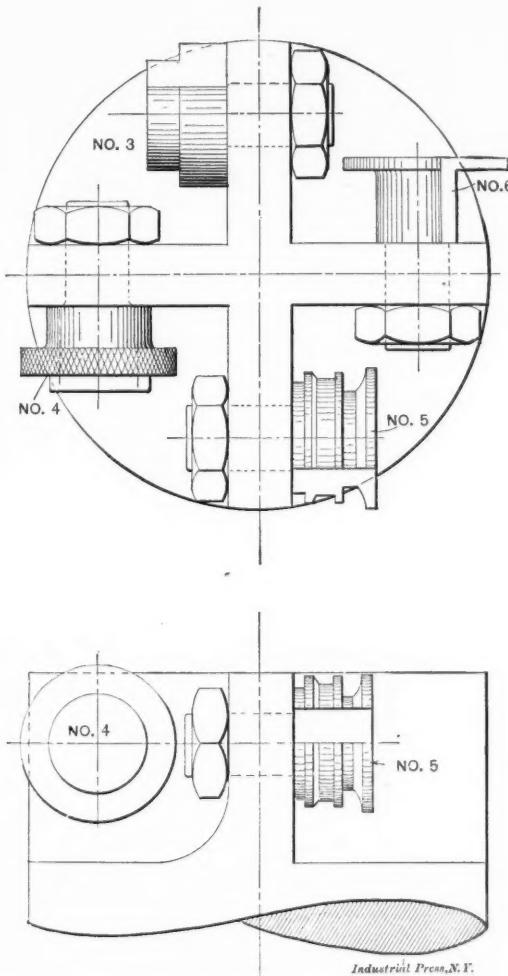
Turret for Holding the Forming and Cutting-off Tools.
